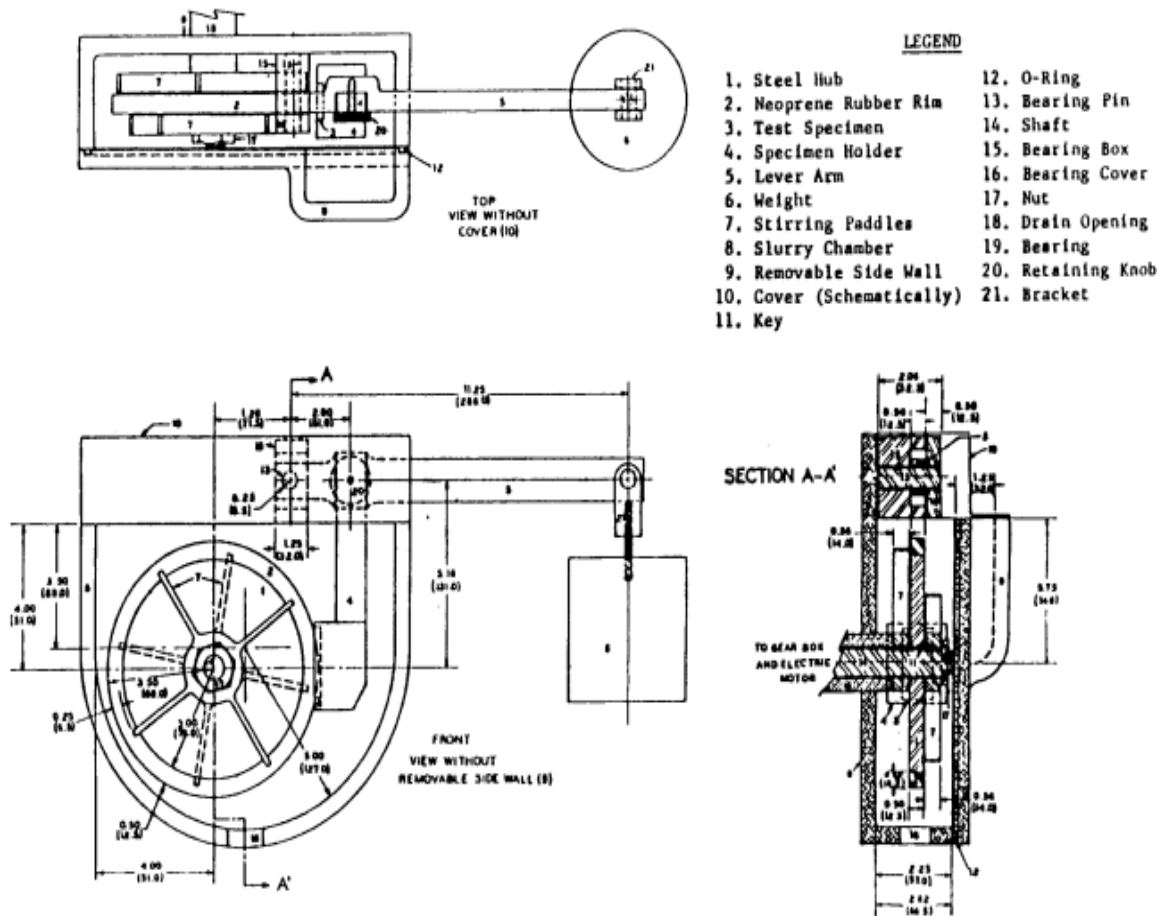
Wet Sand/Rubber Wheel Abrasion Test Apparatus
